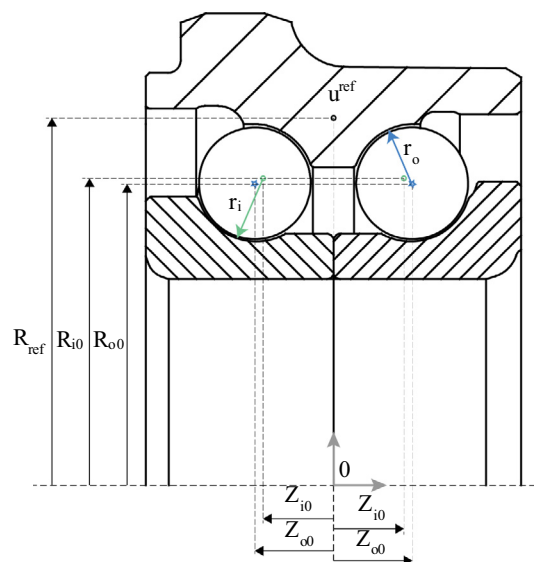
Schematic view of HBU 3 bearing considered in this study.
